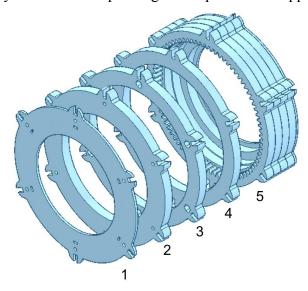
Housing exploded CAD showing the five types of layers needed for the design. Layer 1 is 1/16" in thickness, while all other layers are ¼" in thickness. Layers are numbered 1-5.
